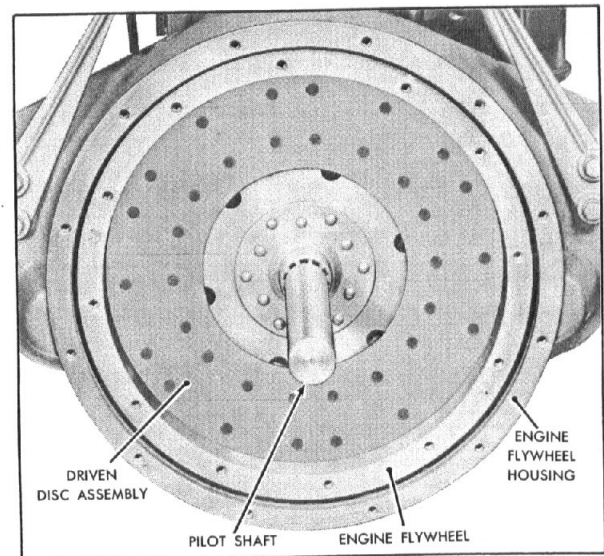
Use of Pilot Shaft in Installing Clutch.
